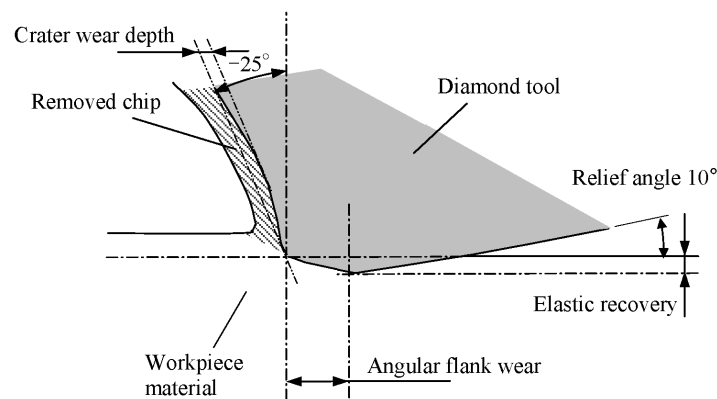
Cross-sectional profile of cutting edge of the tool with a radius of 11.22 mm at a cutting distance of 160 km
